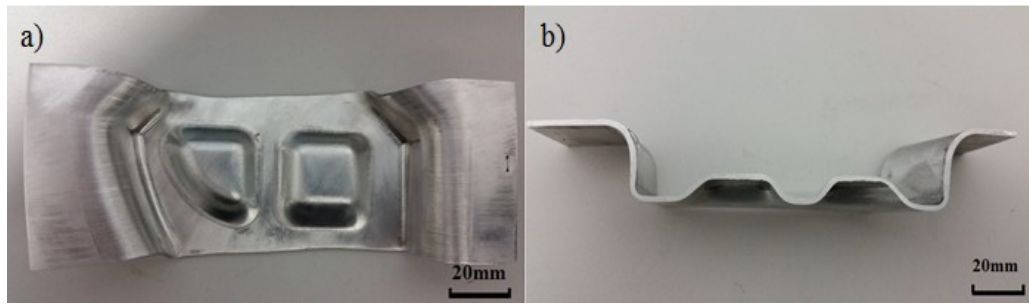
A wing stiffener component formed by two-stage HFQ forming process: (a) top view), (b) cross section view, and
